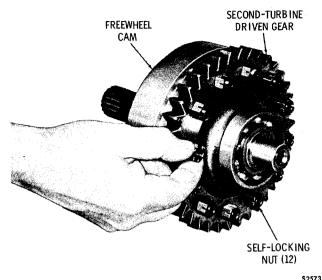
Installing self-locking nut onto freewheel cam bolt
